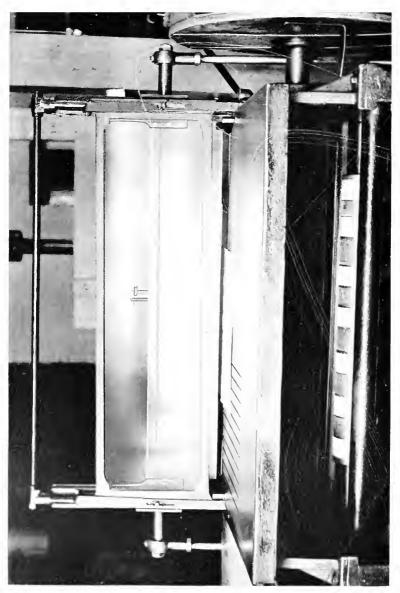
Fig. Q. — Paper-folding machine with adjustable plate-glass guard attached. (Courtesy of Eaton, Crane & Pike Company, Pittsfield.)
